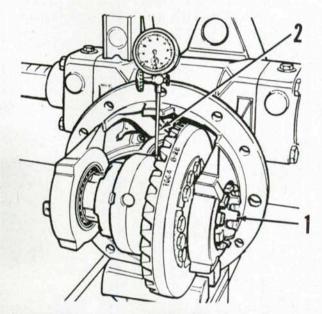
A—Use a dial indicator (2) to measure backlash between ring gear and pinion. Turn adjusting nut (1) to adjust backlash.
